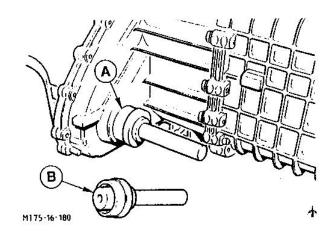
A - Radial ofl seal B - Special Tool 14-028.
